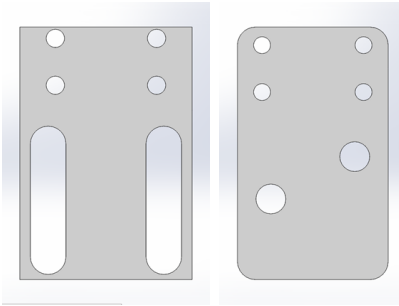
(Left) Previous Limit Switch; (Right) New Limit Switch
